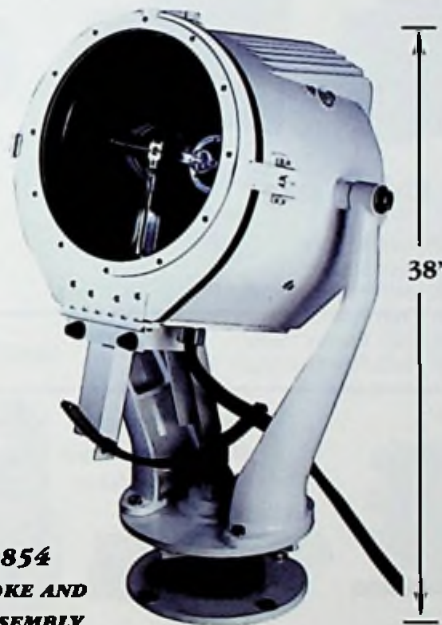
HEAD, YOKE AND BASE ASSEMBLY
